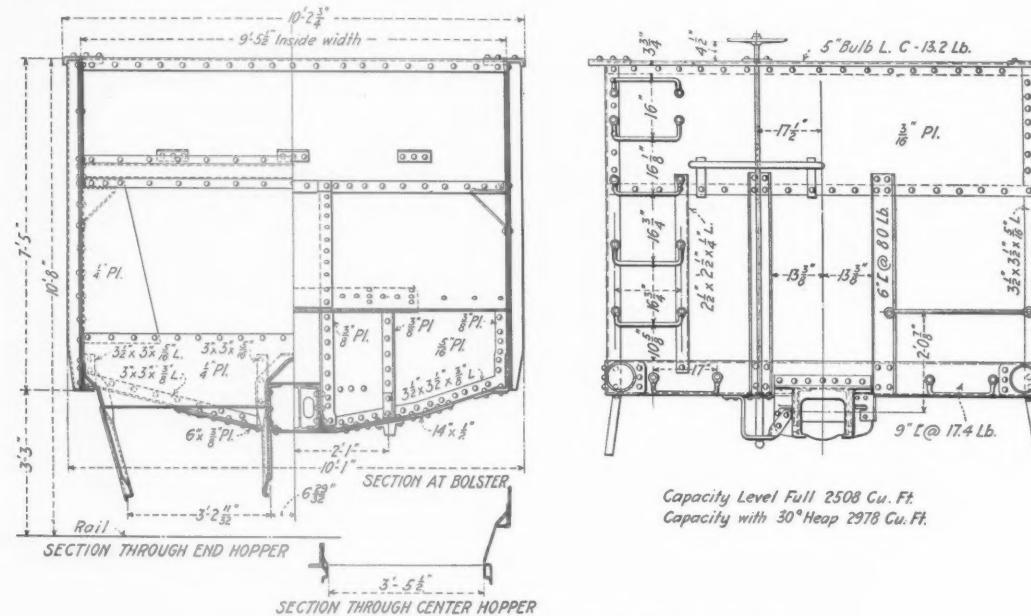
Sections of the Standard 70-Ton Hopper Car
